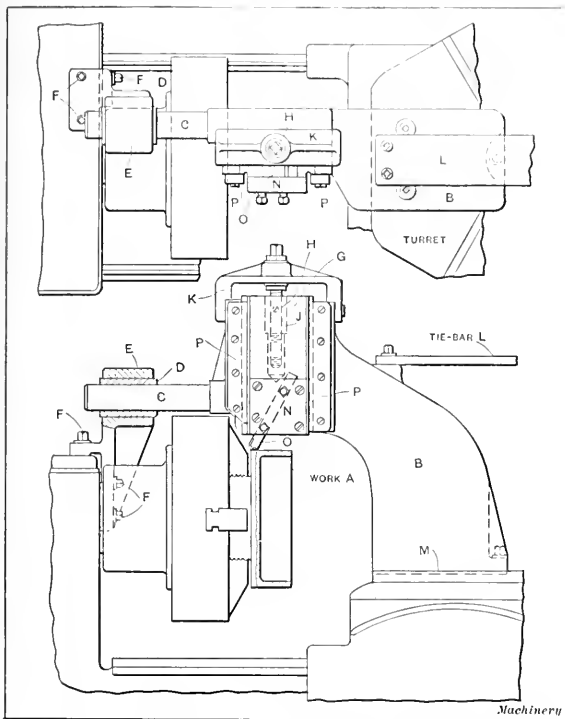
Adjustable Piloted Turning Tool for Large Work
